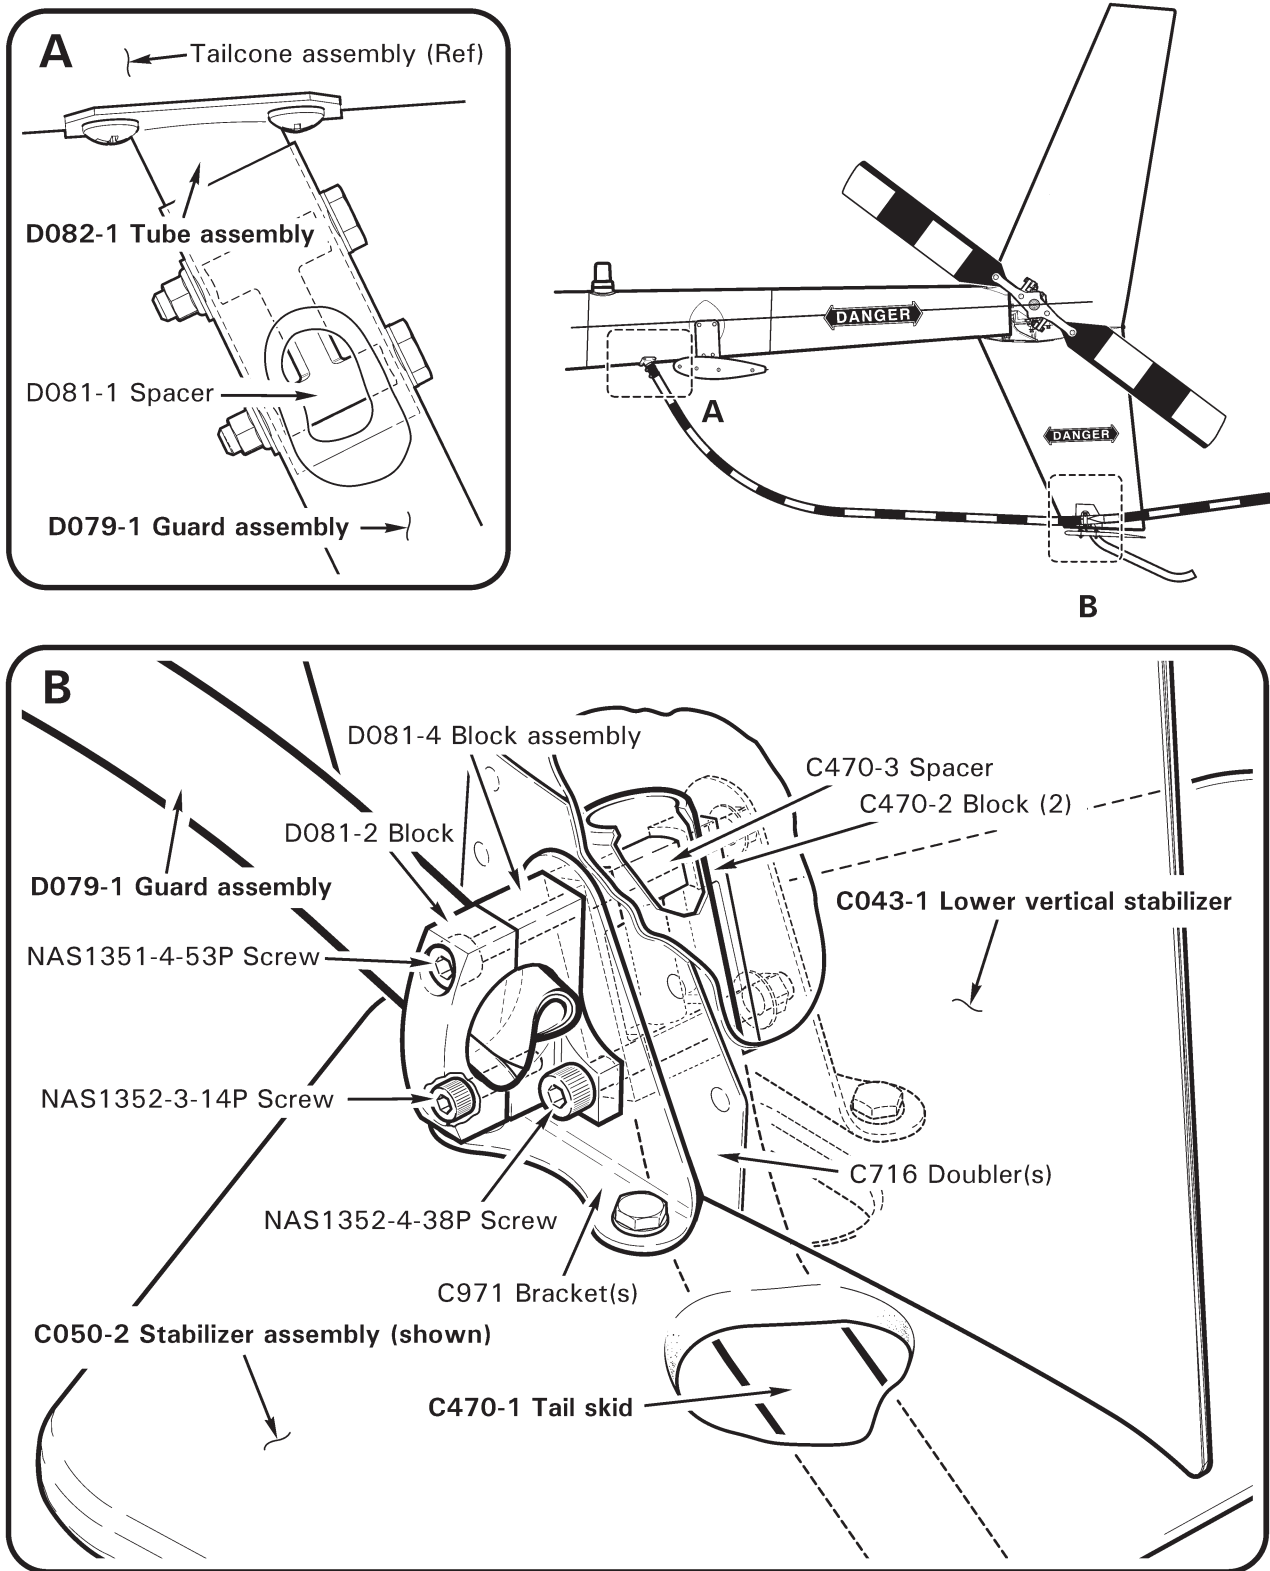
EMPENNAGE – TAIL ROTOR GUARD
